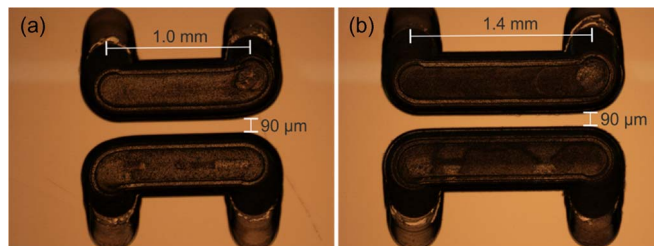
Optical microscope images of milled grooves prior to UV writing and etching. (a) 1 mm. (b) 1.5 mm.
